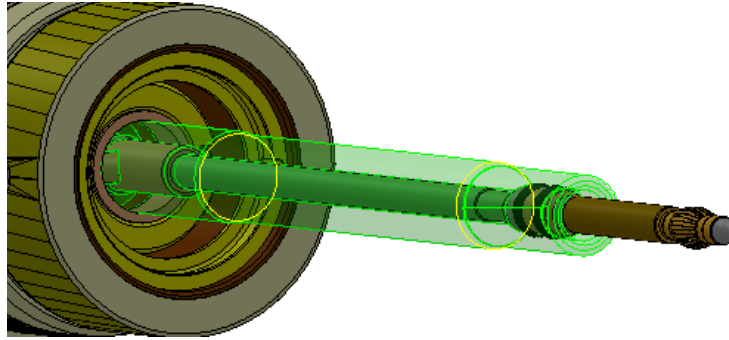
Transparent view of the Soldered Feedthrough Assembly in the Shaft
